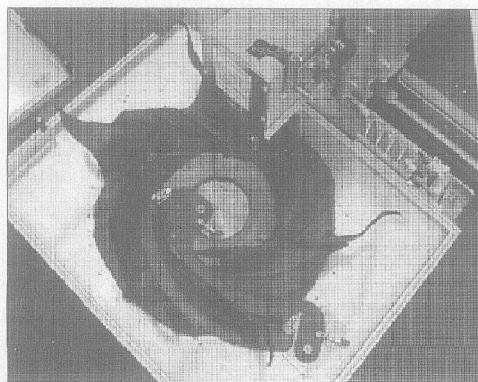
KSL CNC sewing machine for connection of blades and under plate
